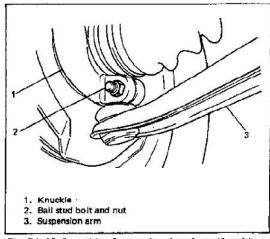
A-10 Detaching Suspension Arm from Knuckle
